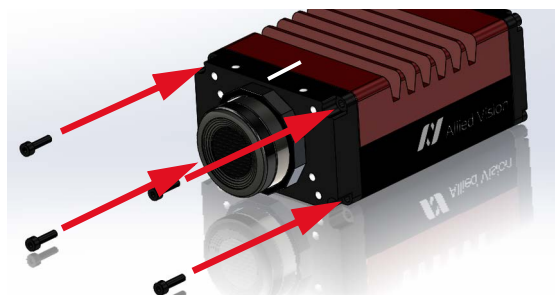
Inserting and tightening the four M2 x 8 socket head cap screws of the front assembly
